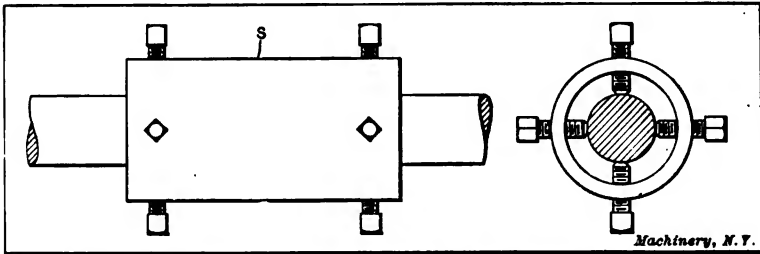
Cat-head which is sometimes used as Bearing for Steadyrest
